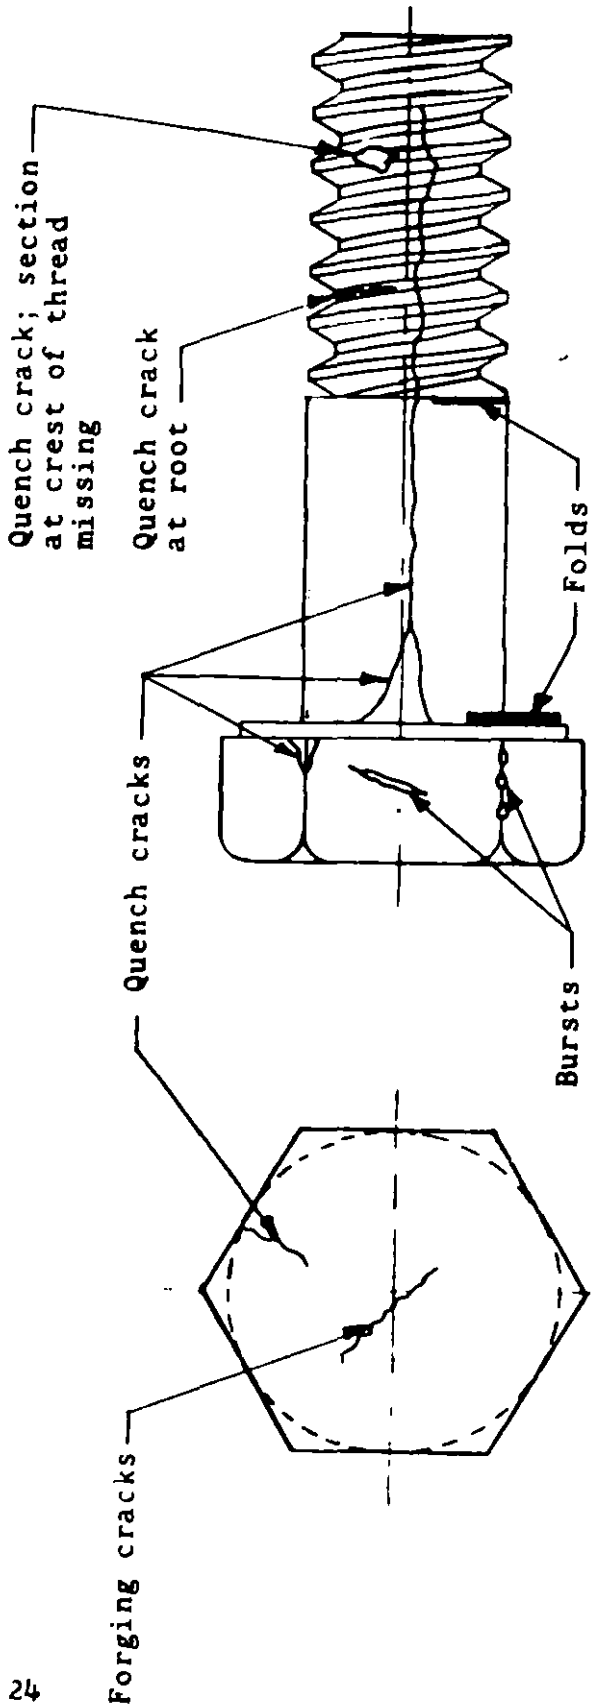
Forging and quench cracks, folds and bursts in screws
